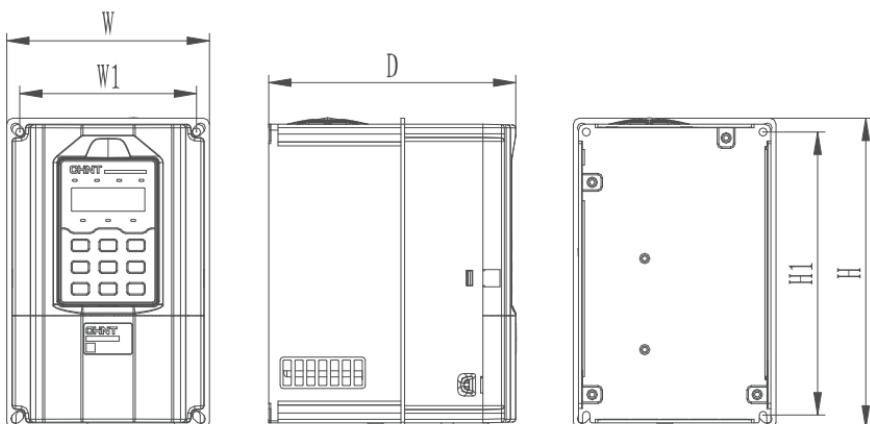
Installation Dimensions of T2-T5 Shell Frame Outline
